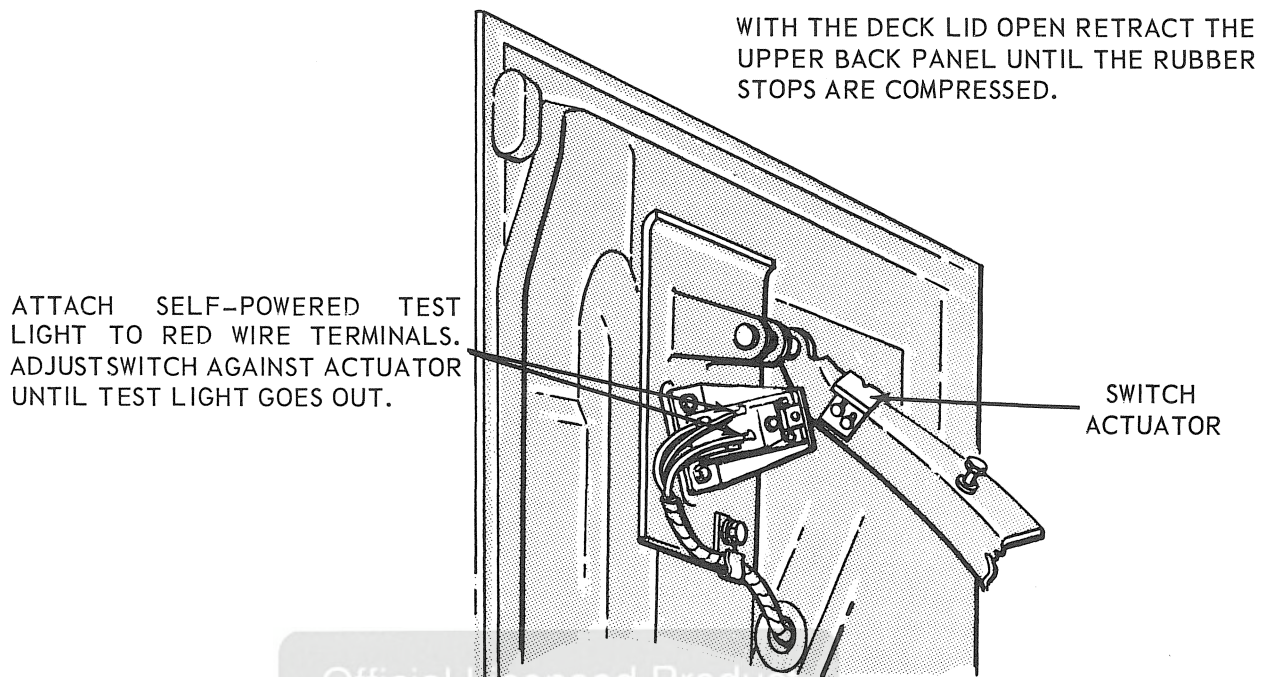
Back Panel Retract Limit Switch Adjustment
